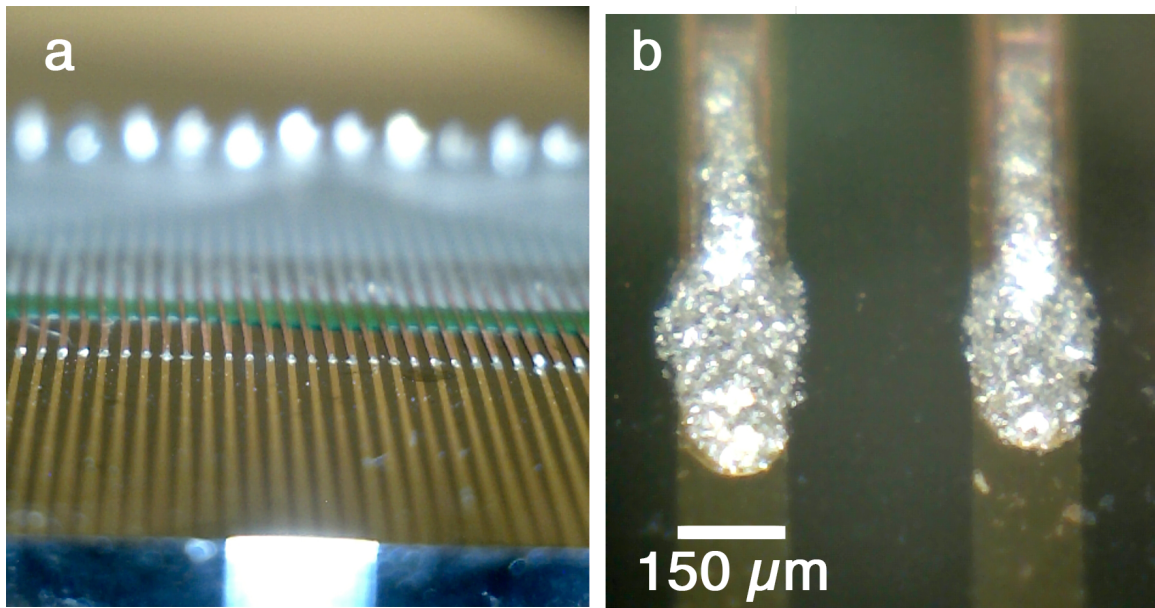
a) The copper comb bounded on detector stripes with epoxy glue, b) typical bondings made by the automatic machine.
